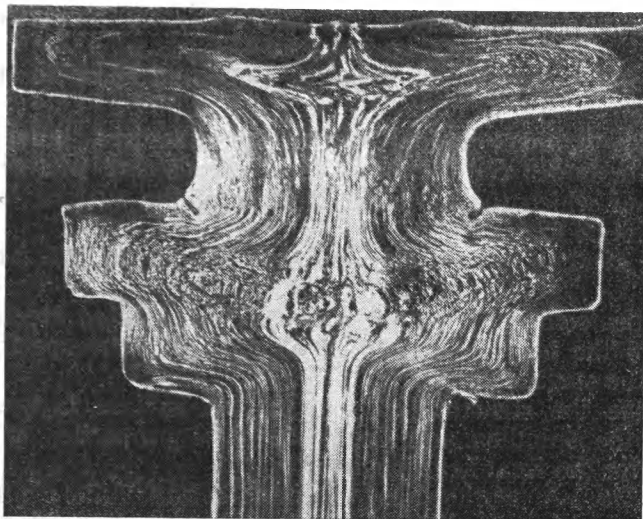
Macrostructure of a gear forging (1/4 of full scale)
